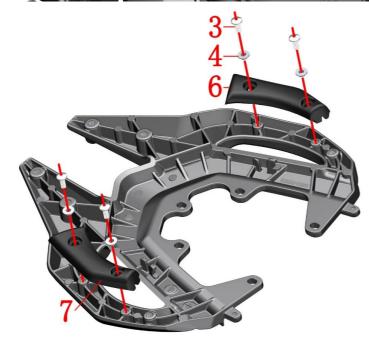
REAR COVER		Rear mud board assembly 1	СНК	0
